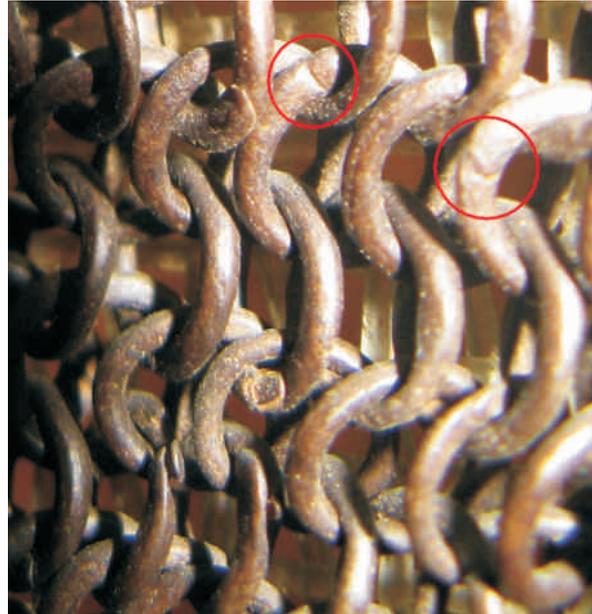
Examples of welded rings in the examined mail. *Photo by N. Checksfield.
